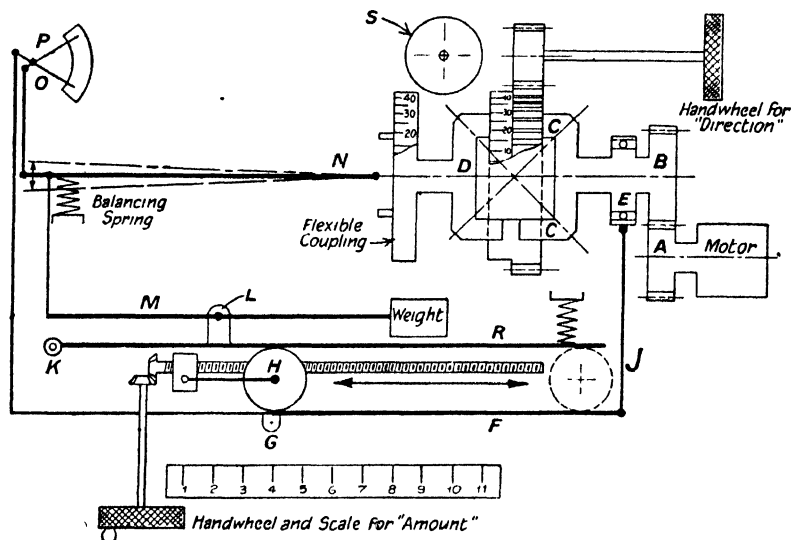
PRINCIPLE OF BENRATH TYPE "RJN" BALANCING MACHINE
